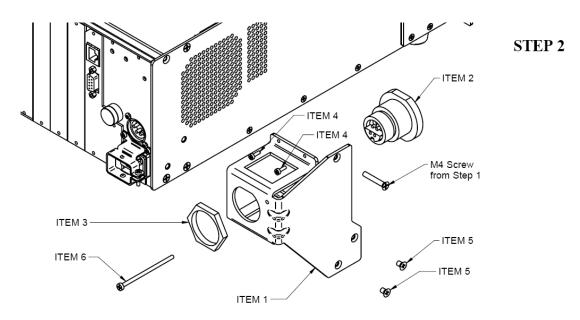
Step 2 – Attach Fiber Breakout Bracket and Fiber Breakout to 350FR Frame
